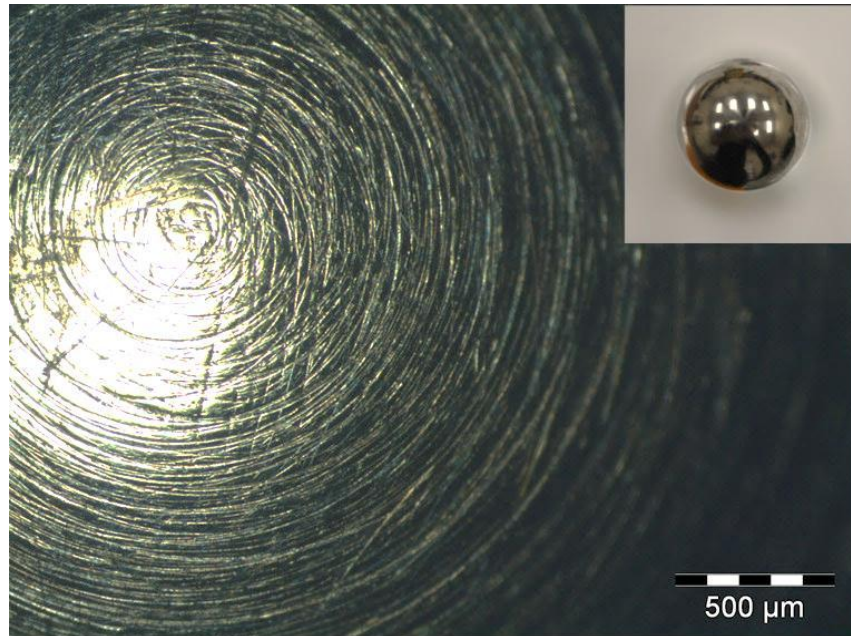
Enhanced microscopic imaging of the unused tooltip surface
